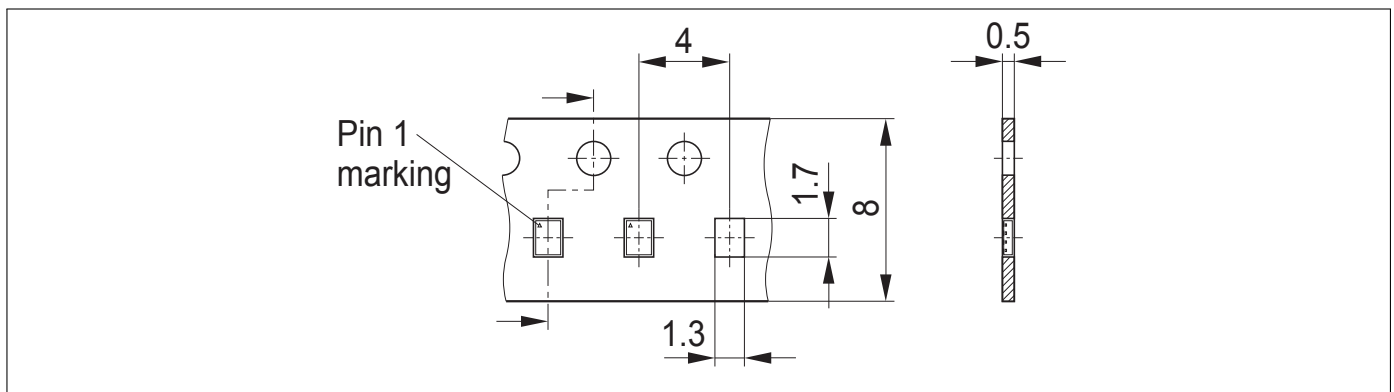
TSLP-10-3 Carrier Tape (all dimensions are in units of mm)
